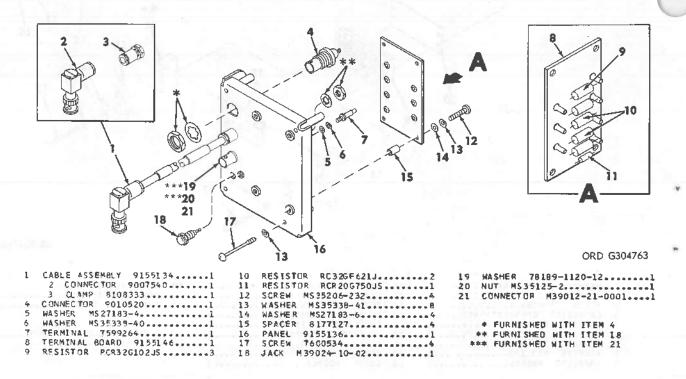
VOLTAGE DIVIDER /9155138/-EXPLODED VIEW /SEE FIGURE 76 FOR NEXT HIGHER ASSEMBLY/
